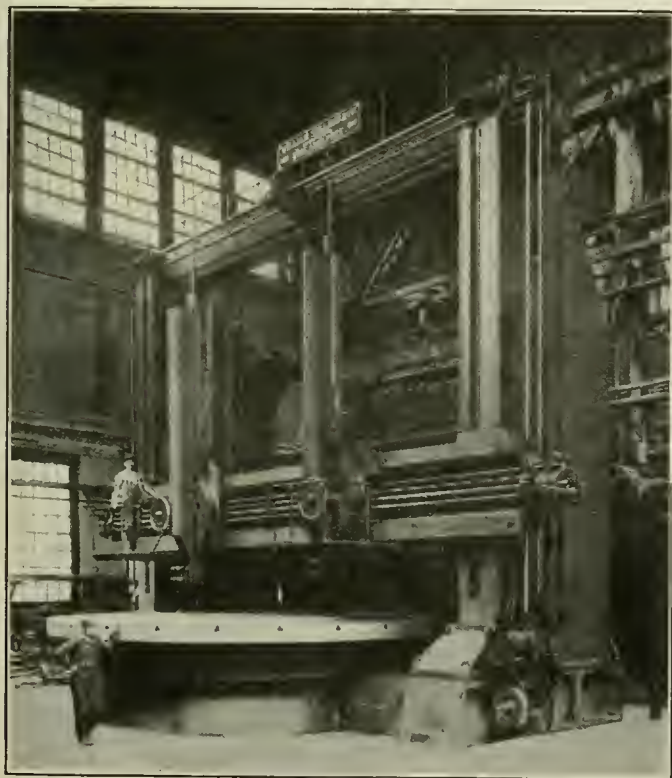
25-FT. BORING AND TURNING MILL WITH 10-FT. STROKE OF TOOL
